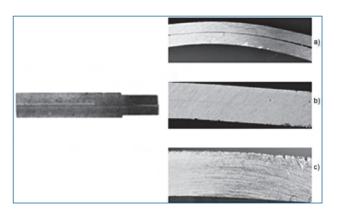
Example of a sheet sandwich before rolling (left) and sections of three specimens (right) representing not welded (a), incompletely welded (b) and properly welded (c) samples.
